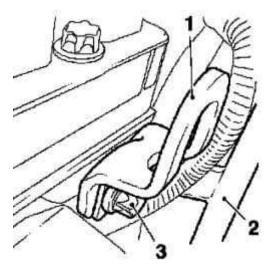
Withdrawal of the guide tube probe for measuring the oil level and the transport engine brackets: 1 - Transportation clamp Engine 2 - guide tube probe for measuring the oil level 3 - bolts fastening
